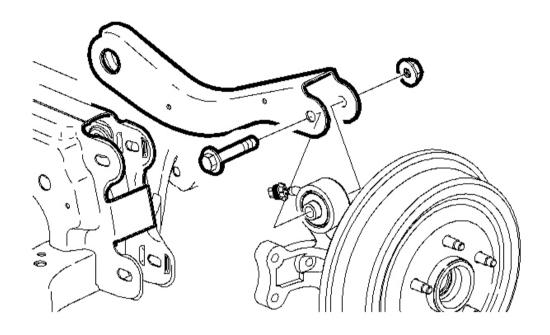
Rear Axle Upper Control Arm, Knuckle Nut & Bolt Courtesy of GENERAL MOTORS CORP.
